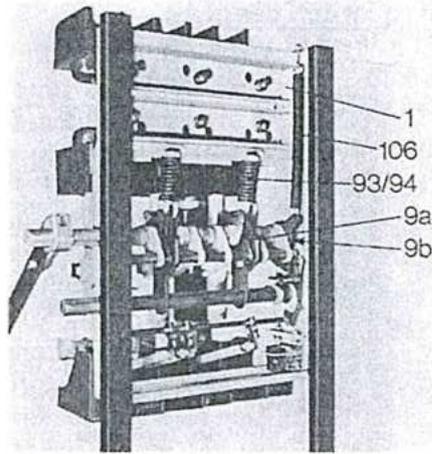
A: Closing springs charged and latched. Opening springs discharged. Switch in OFF-position.
